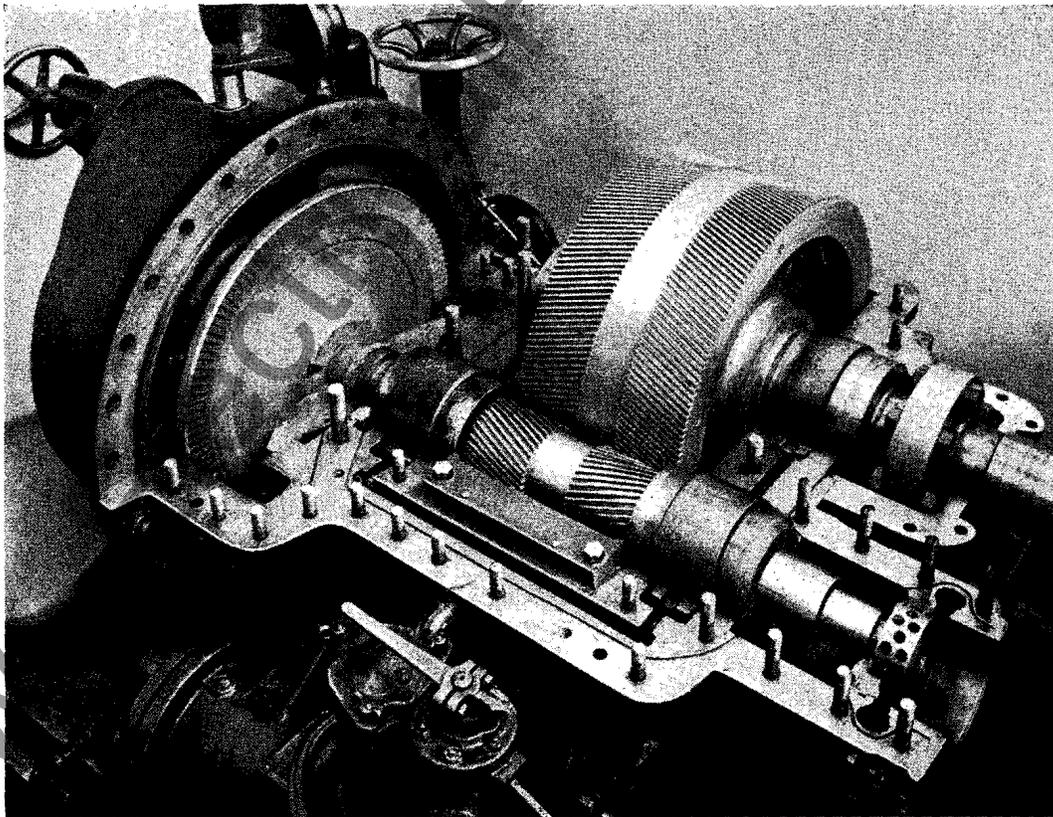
TURBINE AND GEAR, WITH COVER REMOVED
